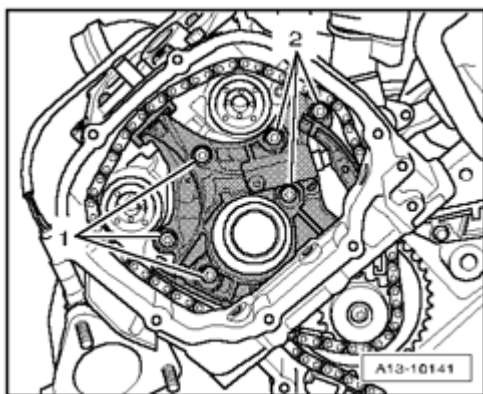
Removing Bolts, Left Chain Tensioner And Left Camshaft Timing Chain
